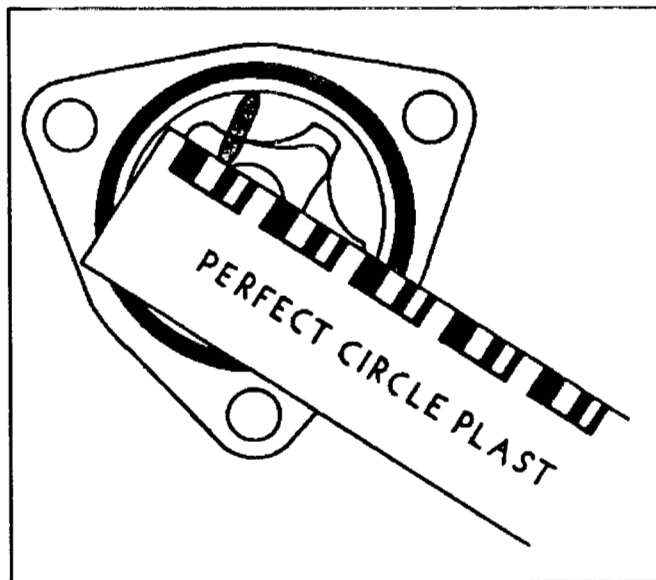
MEASURING ROTOR TO COVER CLEARANCE
